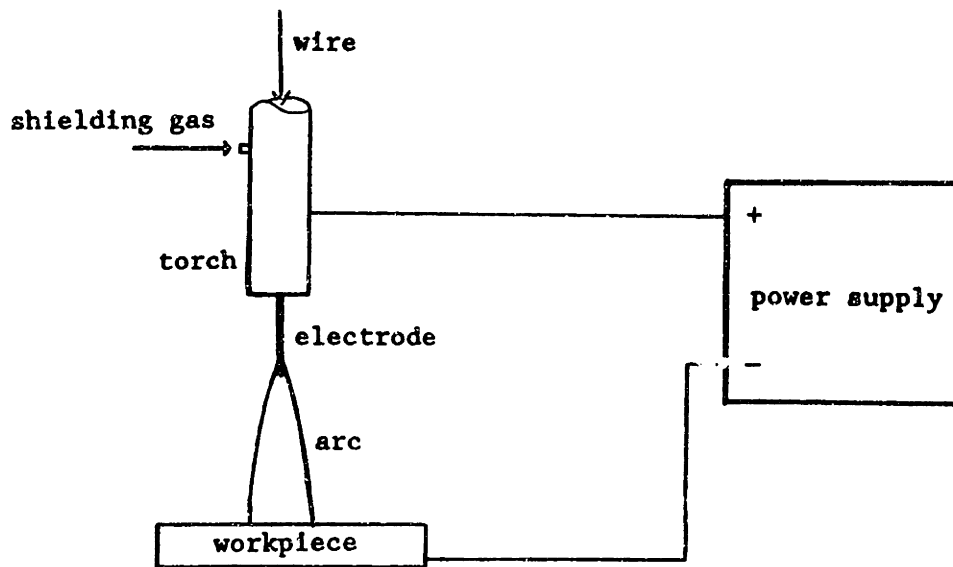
The MIG welding process, shown with reverse polarity.
